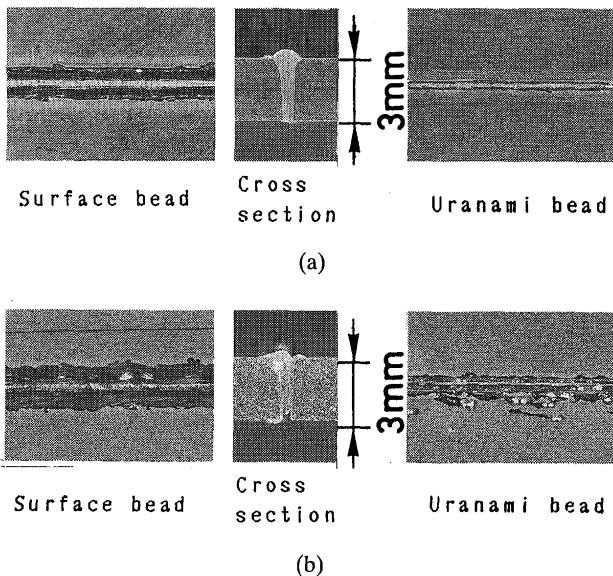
Bead appearance and cross section of Tandem Electron Beam welding (a) and single electron beam welding (b) at the welding speed of 15 m/min.
